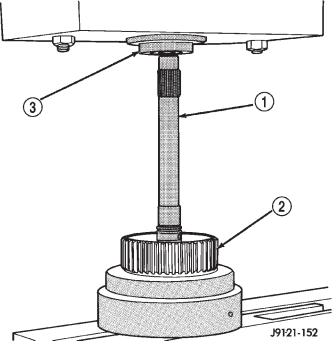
Pressing Input Shaft Into Rear Clutch Retainer
